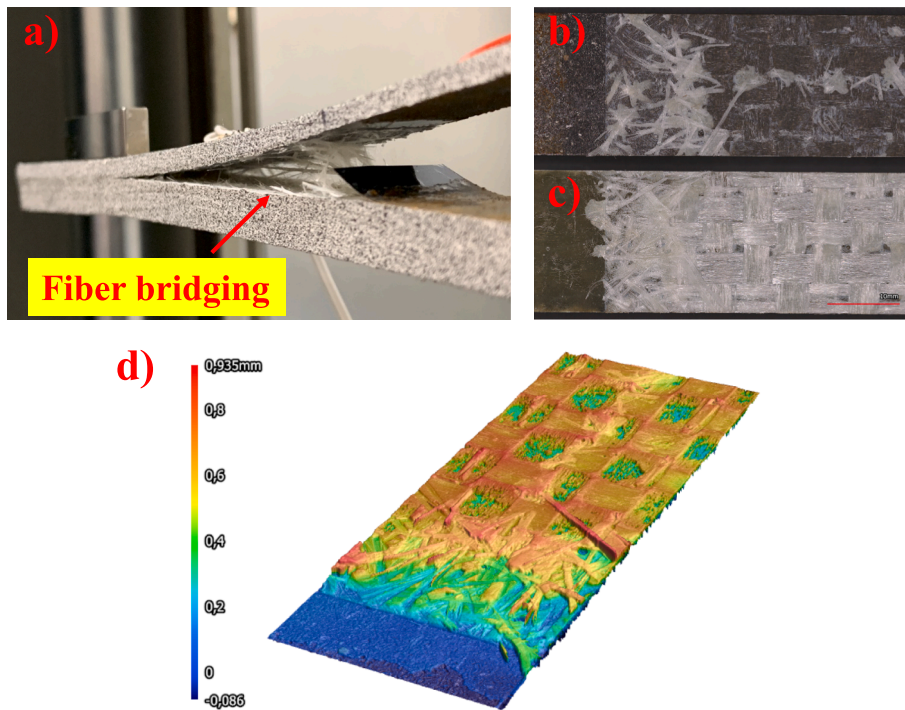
Fracture surface morphology: a) fiber bridging observed during loading; b) fracture surface on steel and c) composite adherend; d) 3D scan of the fracture surface on the steel adherend.
